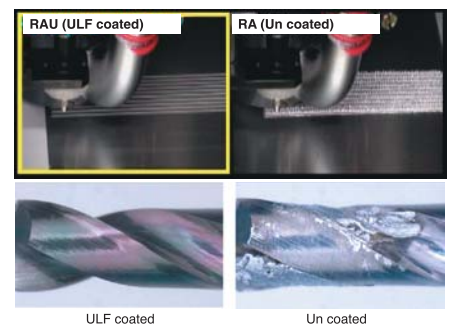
Improvement of breakage resistance using the ULF coating $\phi 0.1\text{mm}$ drill
